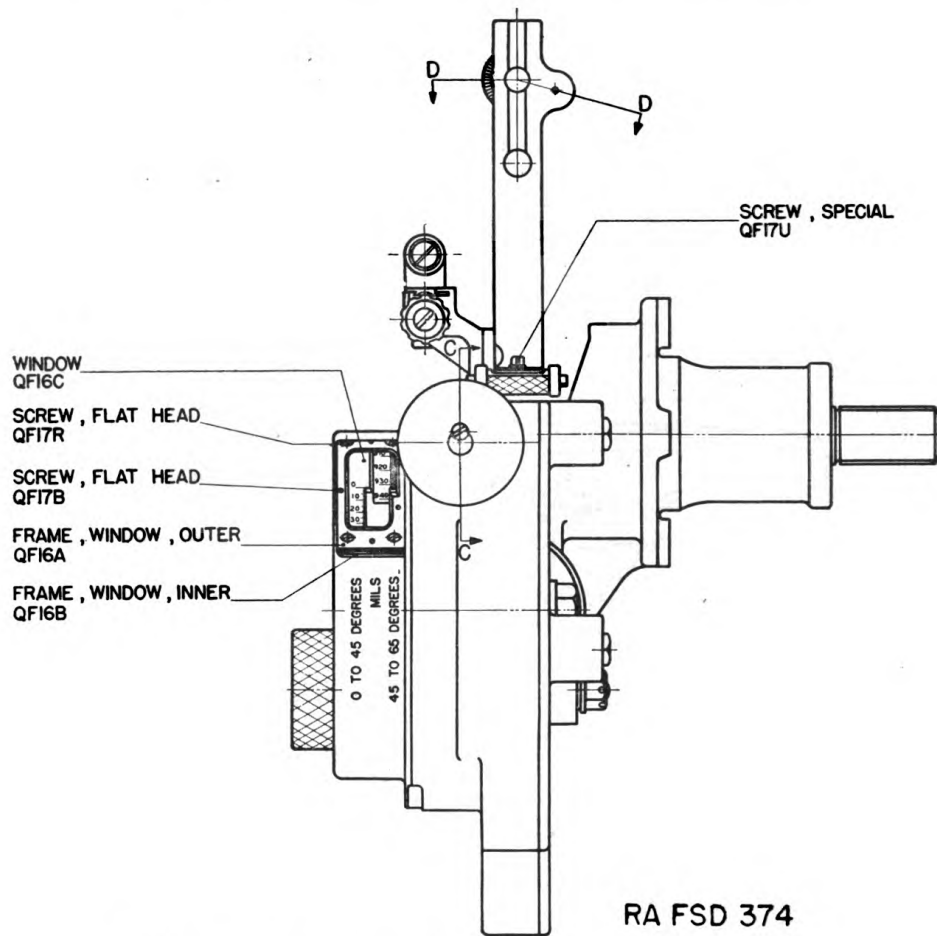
Quadrant sight, M1918A1—assembly views—Continued.
